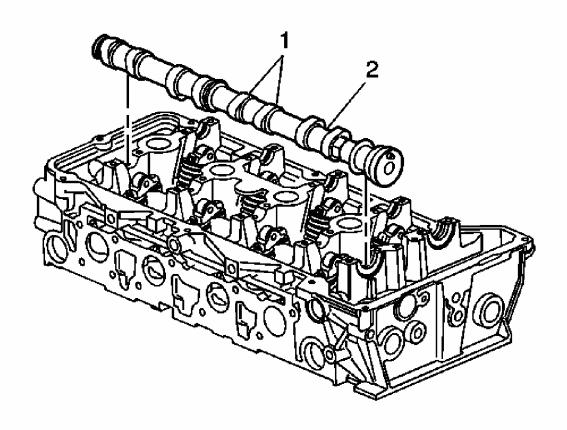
Identifying Camshaft Lobes & Journals Courtesy of GENERAL MOTORS CORP.
